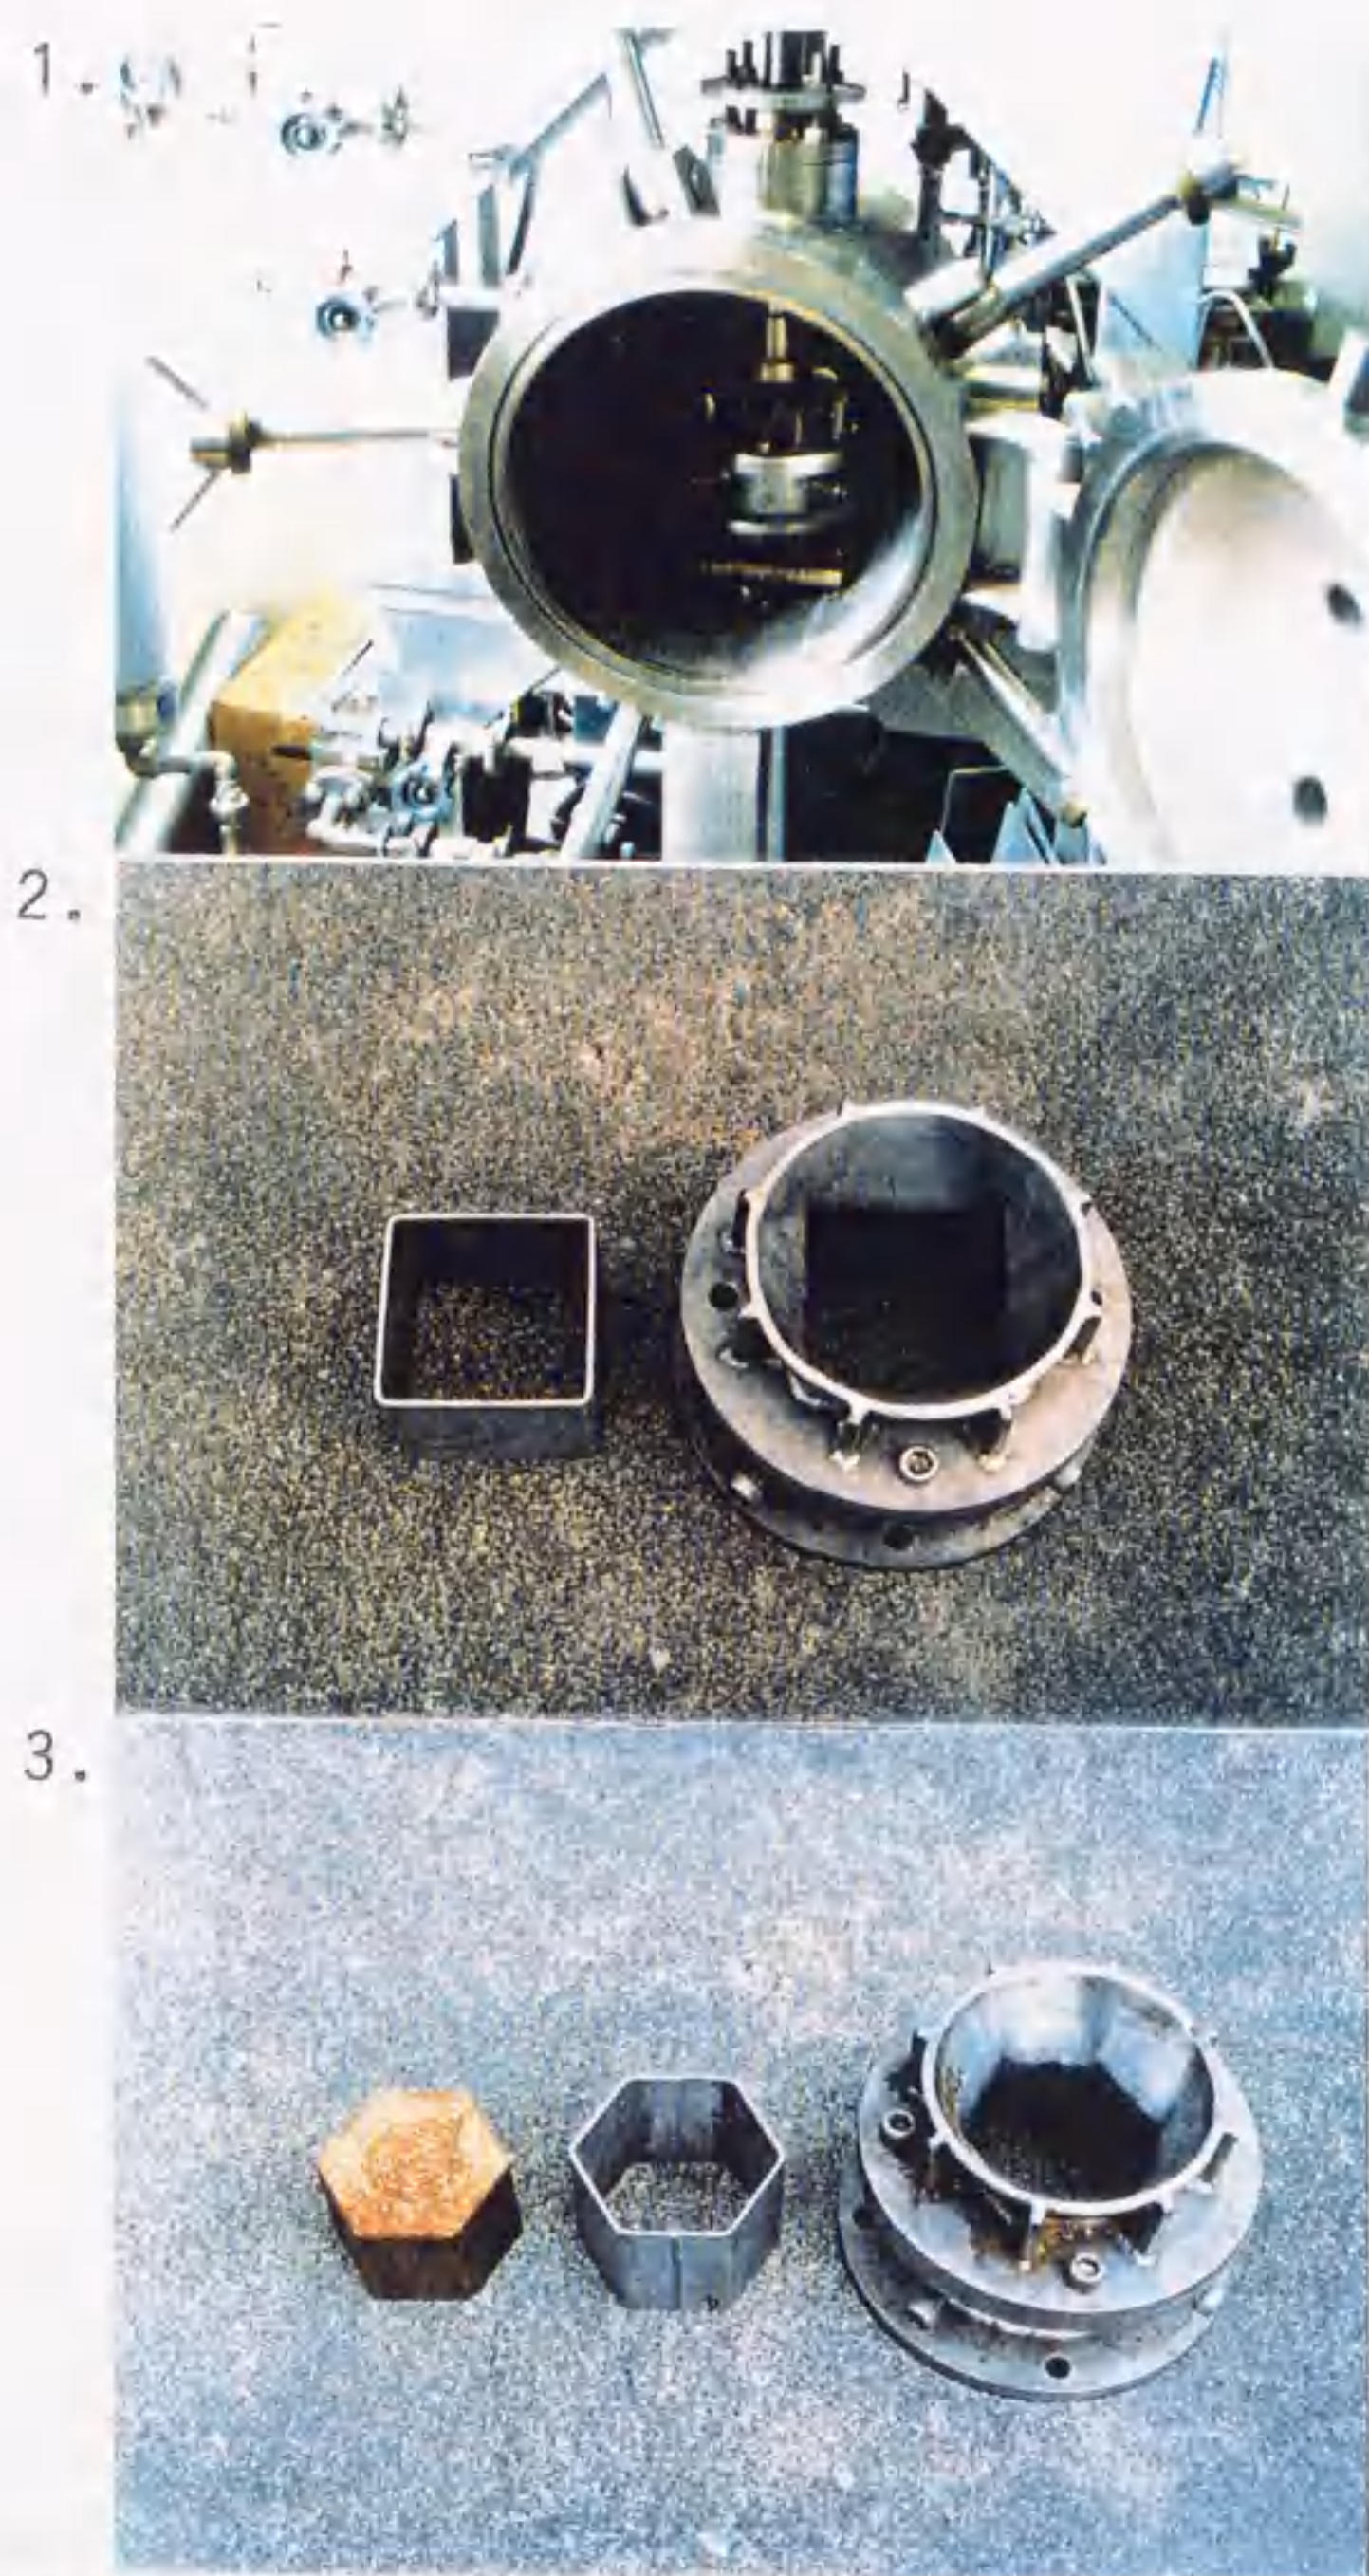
The jigs for manufacturing process of compressive-molding under high temperature steam atmosphere.
